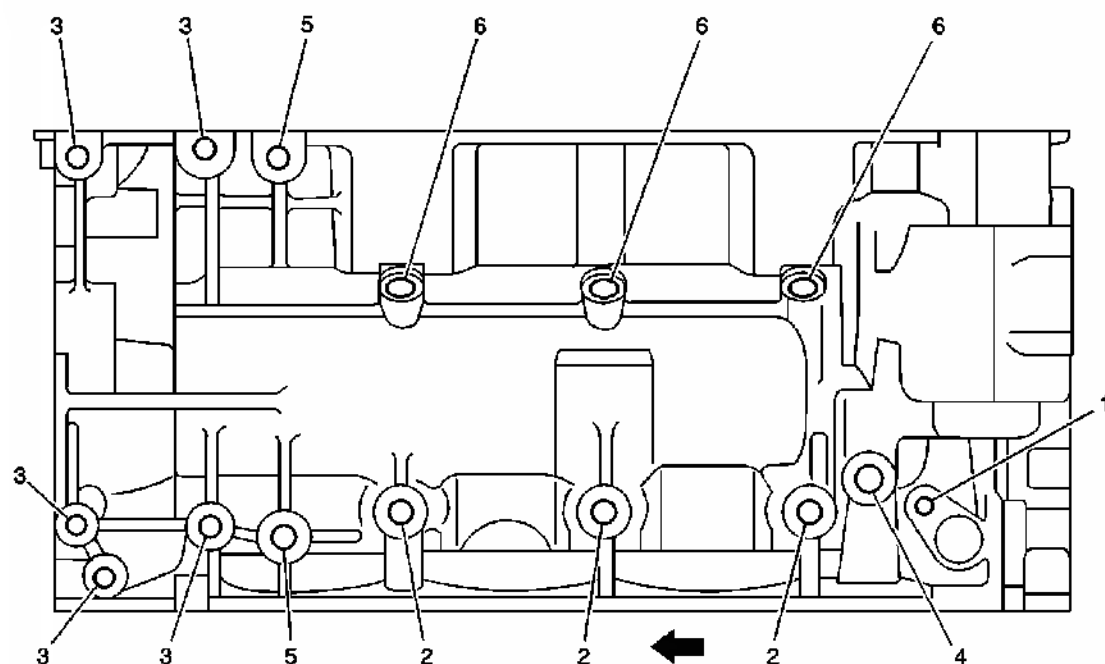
Identifying Bolt Size & Locations On Engine Block - Right Side
